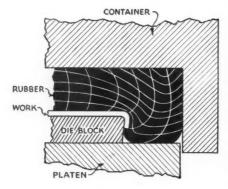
Drawing illustrating action of rubber pad in operation of rubber die press.
